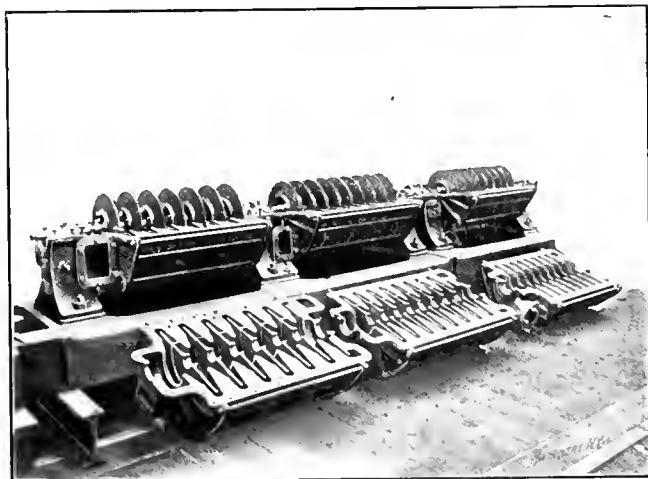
Rateau Turbo-compressor built by Brown, Boveri & Co. to be driven by Gas Turbine.
